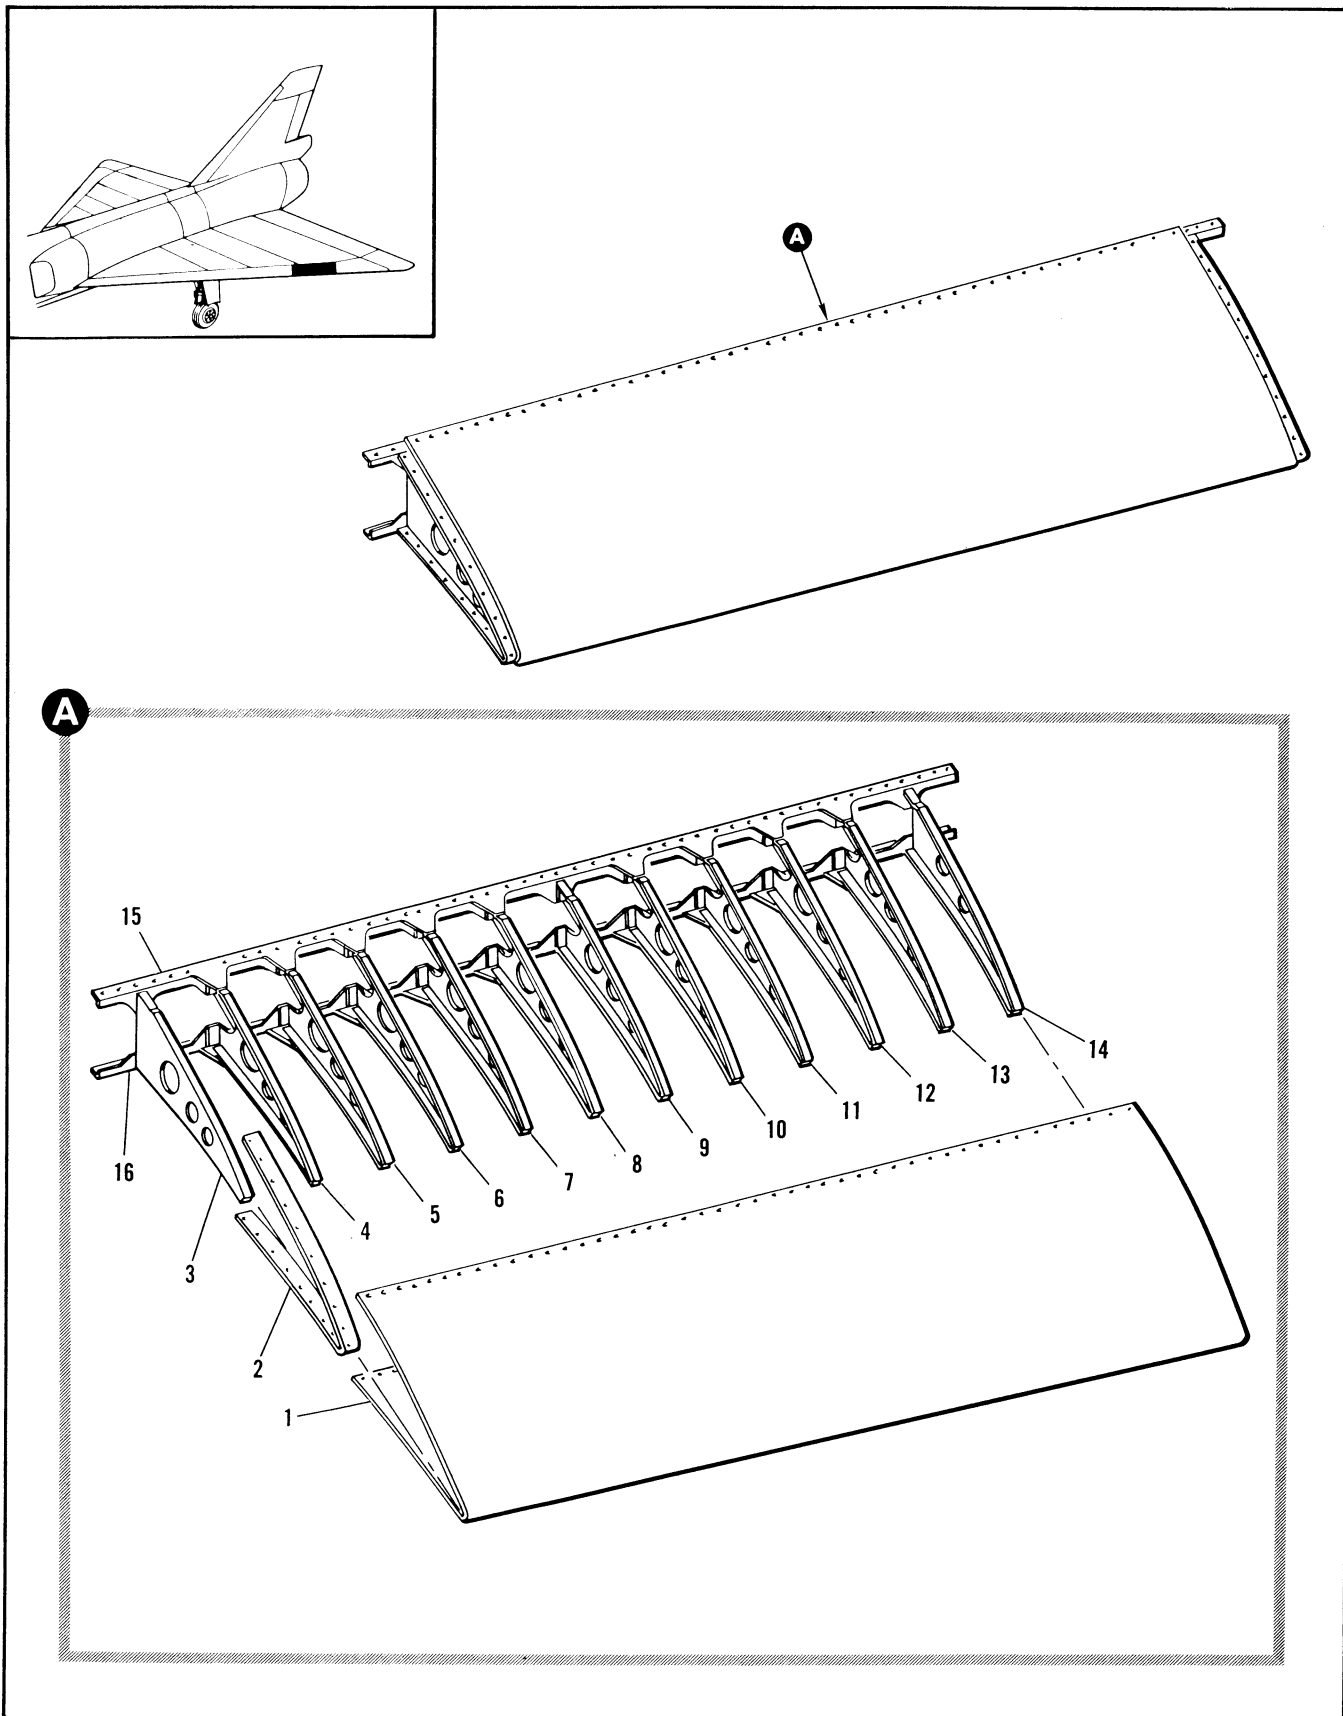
Wing Leading Edge Assembly Sta 338 to 384
